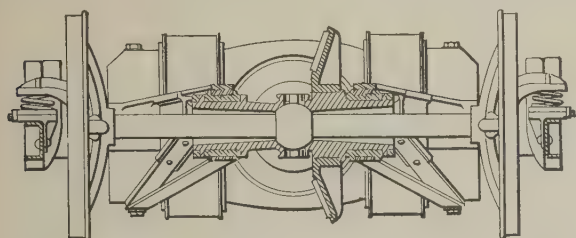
FLEXIBLE GEAR SHAFT—DETROIT MOTOR.
